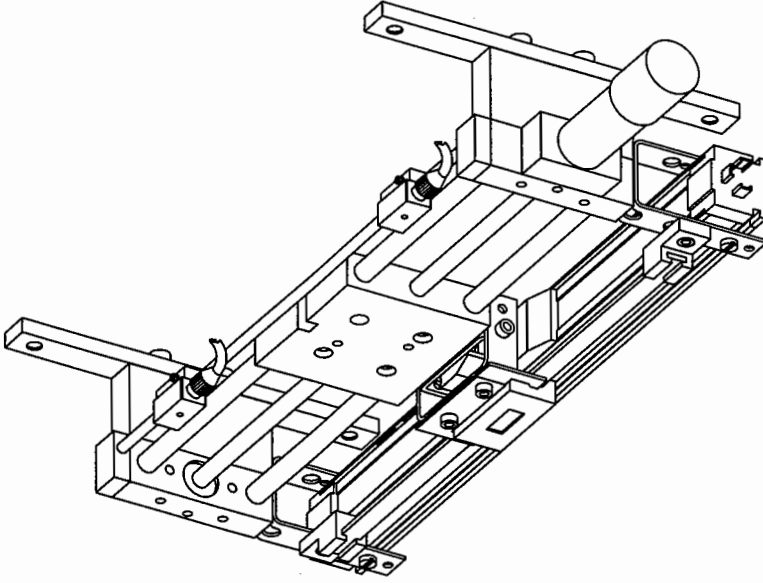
/1: Spindle drive unit with assembled linear potentiometer and – as a reference – a measuring slide
